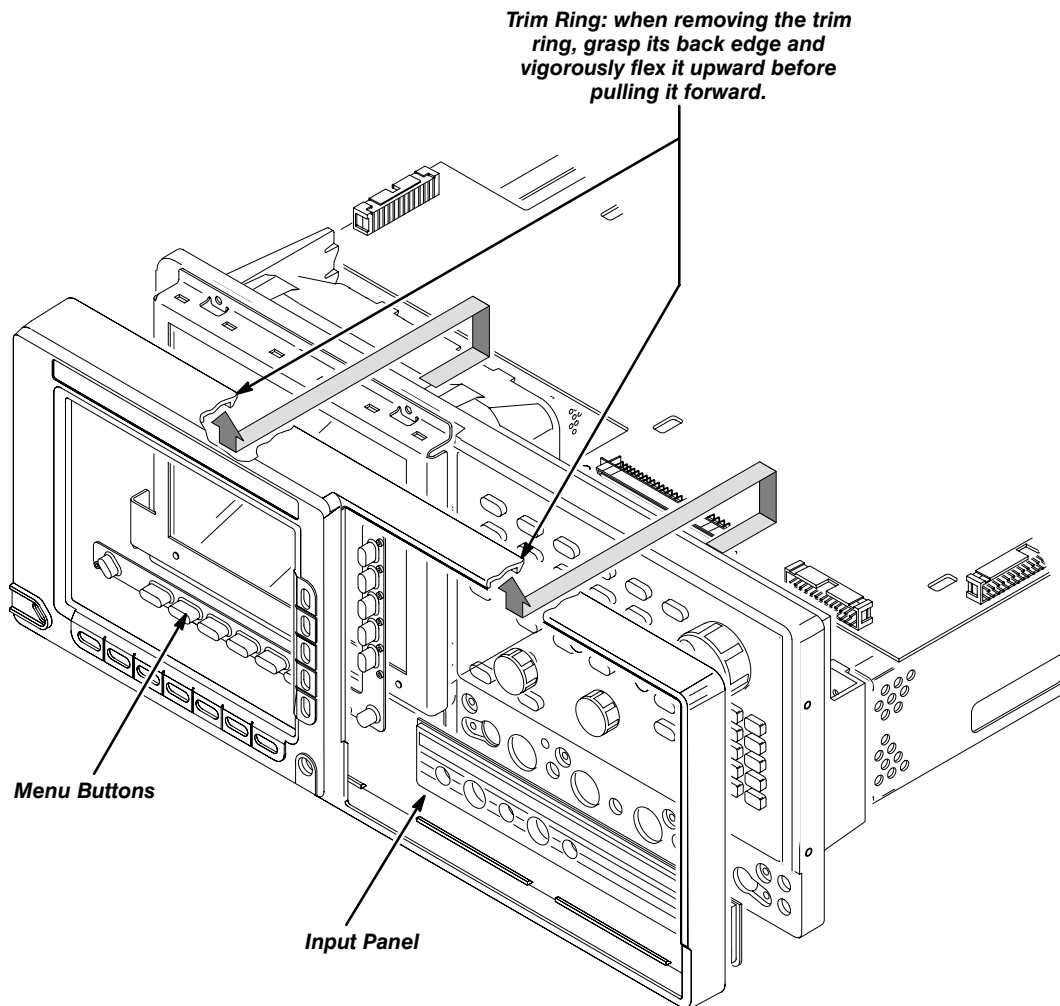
Front Cover, Trim Ring, Menu Buttons, and Input Panel Removal (Front Cover not Shown)
